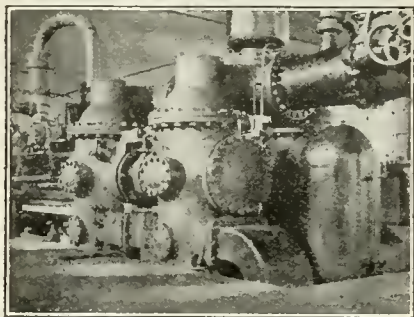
STEAM PUMP IN WHICH WELDED CYLINDER OPERATED.
